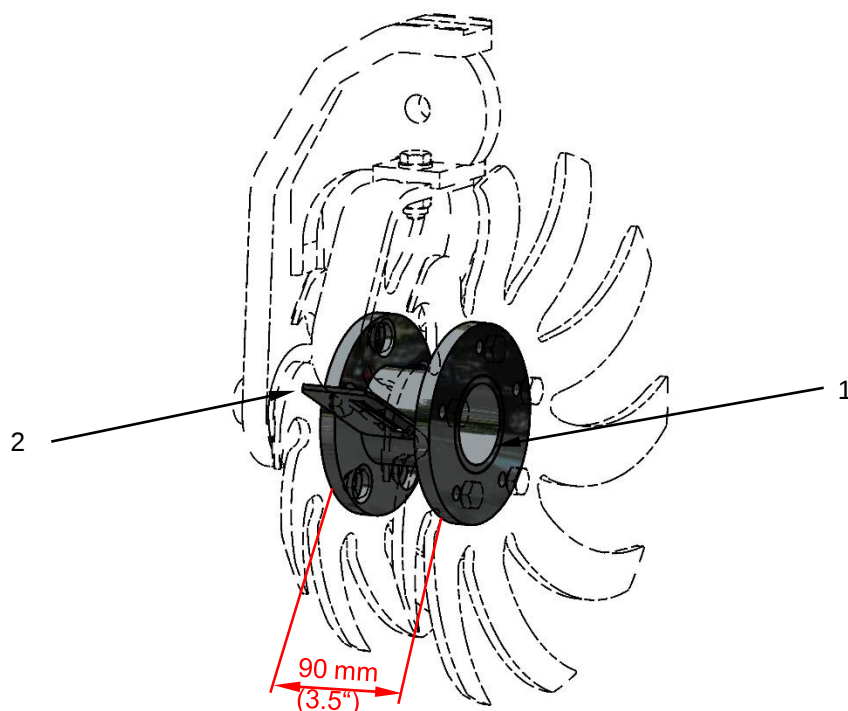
Spare parts Finger Roller conversion kit 90 mm (3.5")
